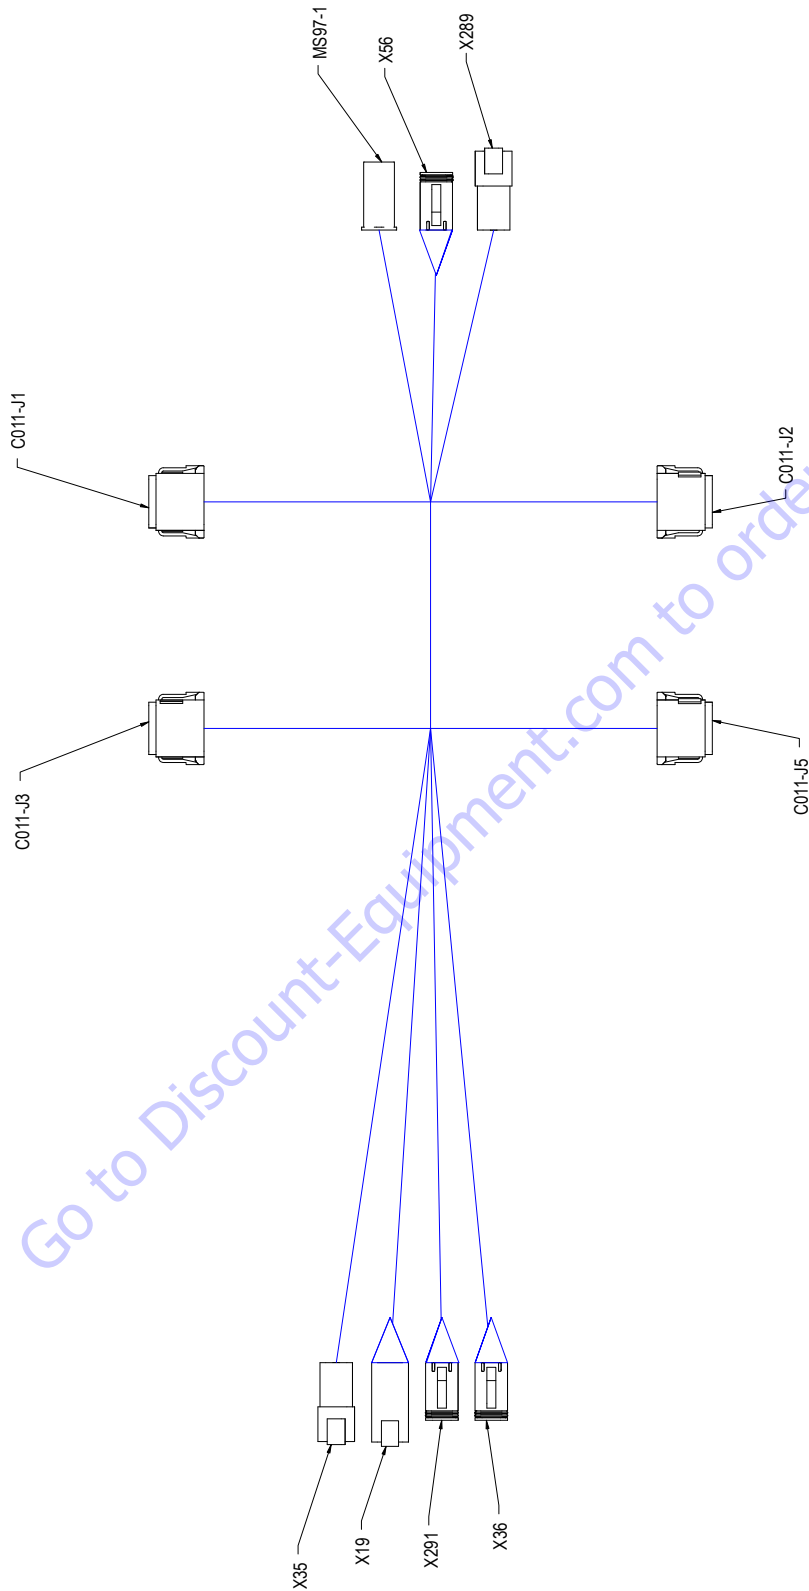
Jib Valve Harness - Sheet 2 of 3
